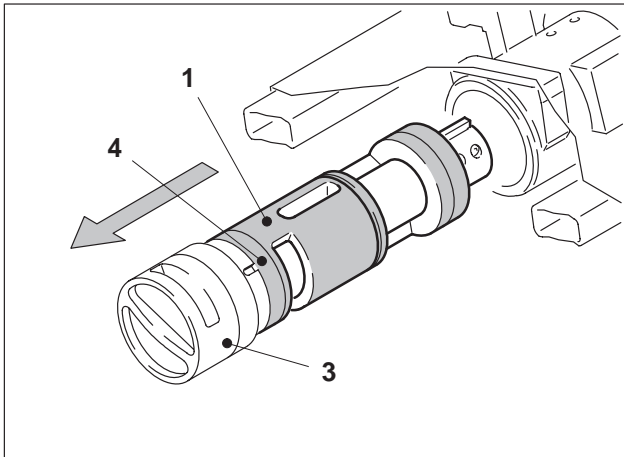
Rotary valve "suction tape vacuum regulation"; cleaning the surface
